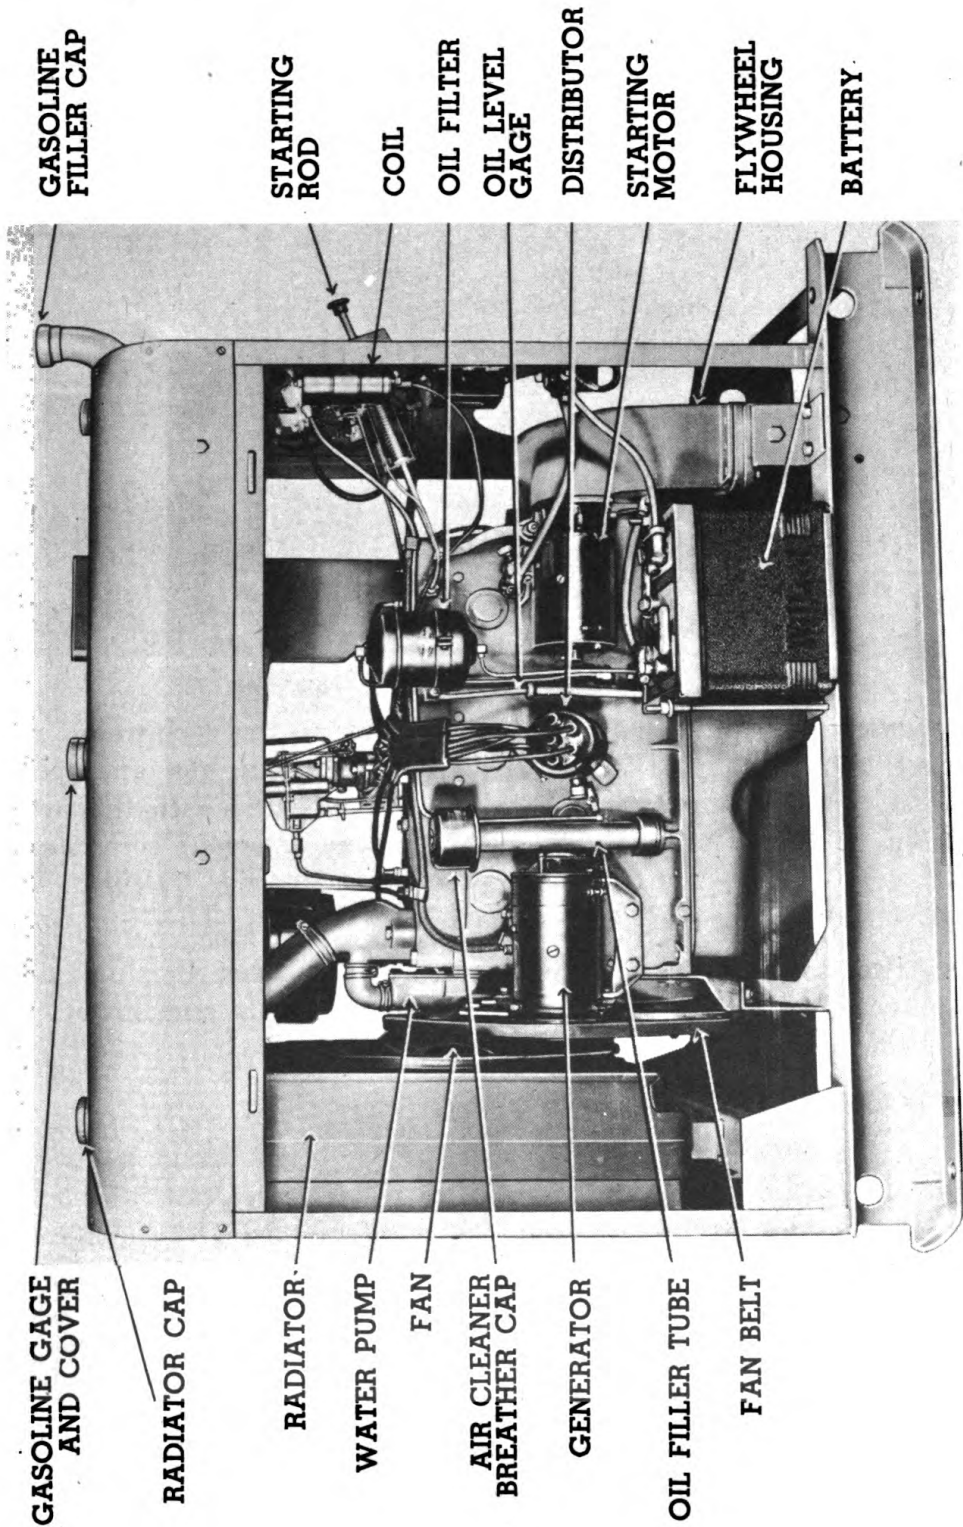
View of Distributor Side of Chrysler T-108-503 Engine
